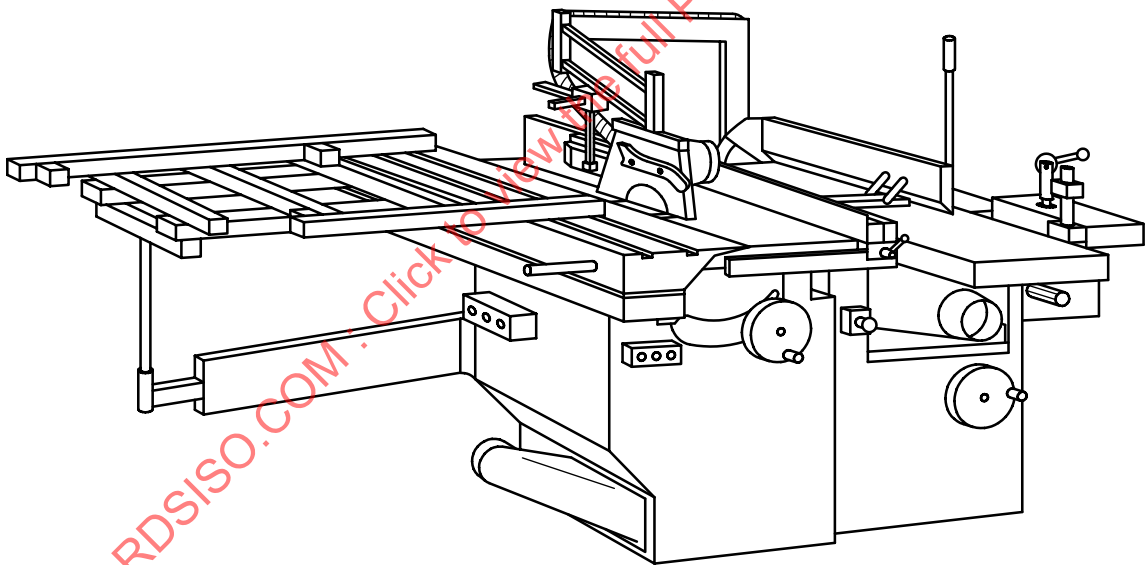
Example of a machine with dimension saw, moulding and planing units, with a mortising device
